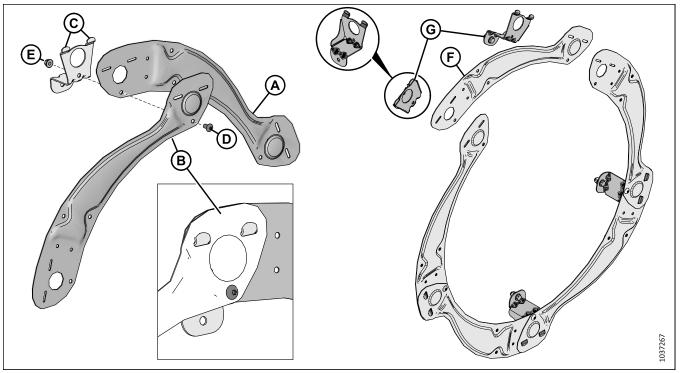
Five-Bat Reel – Initial Endshield Assembly
